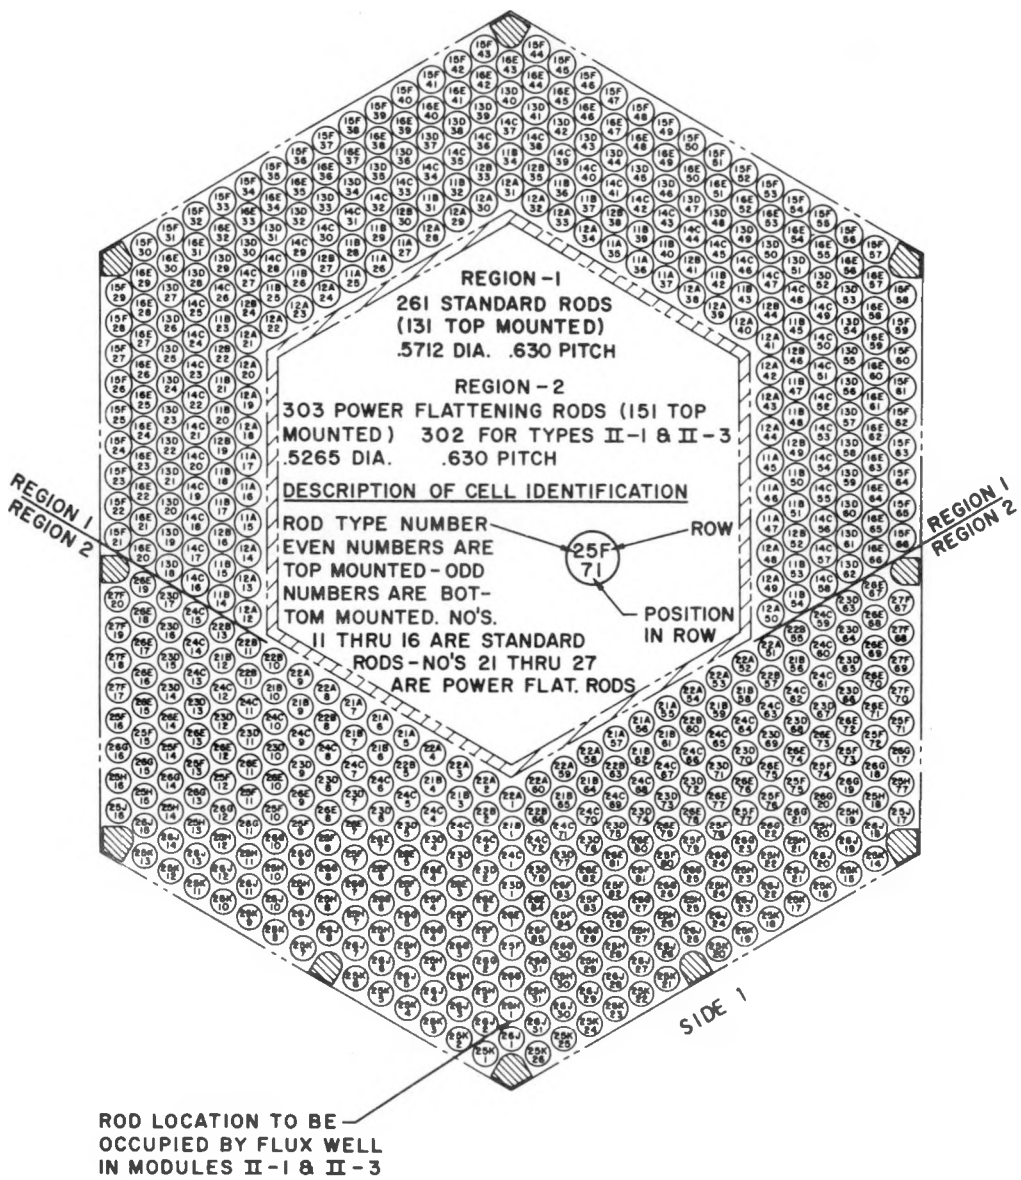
LWR Type II Blanket Module Rod and Cell Identification
